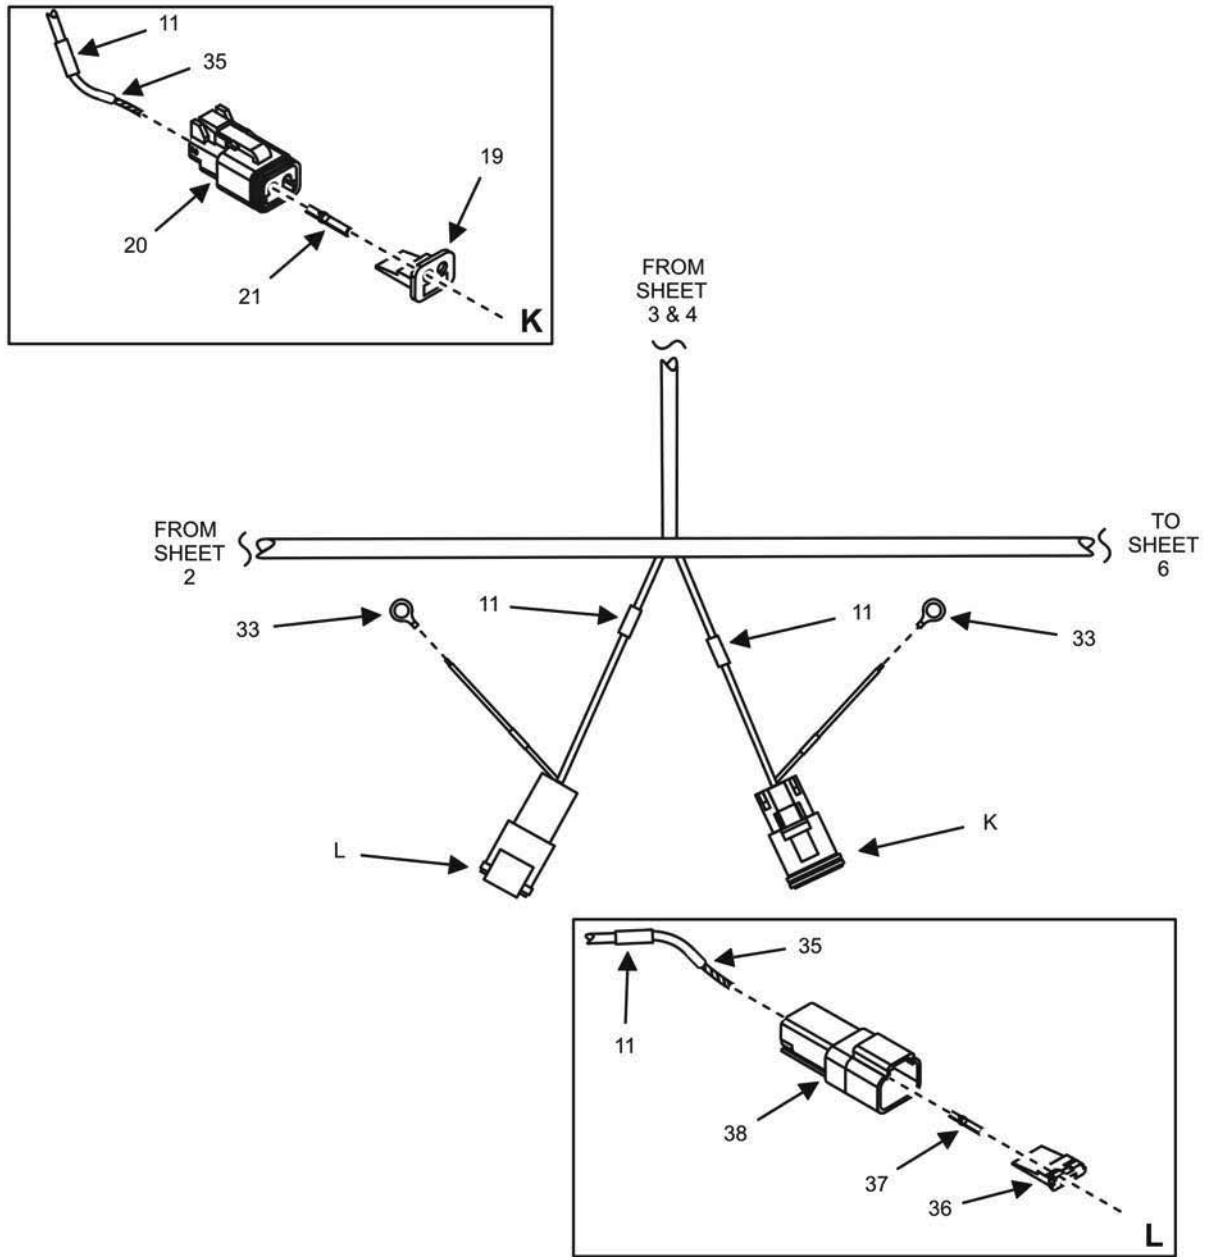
Engine Wiring Harness (Sheet 5 of 14).
